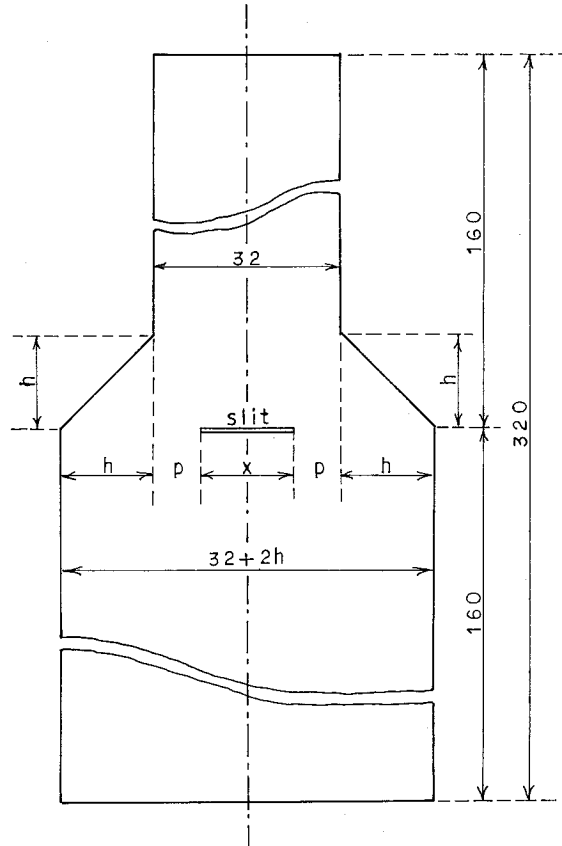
Idealized model specimen of a fillet welded Tee-joint for the experiment MF
